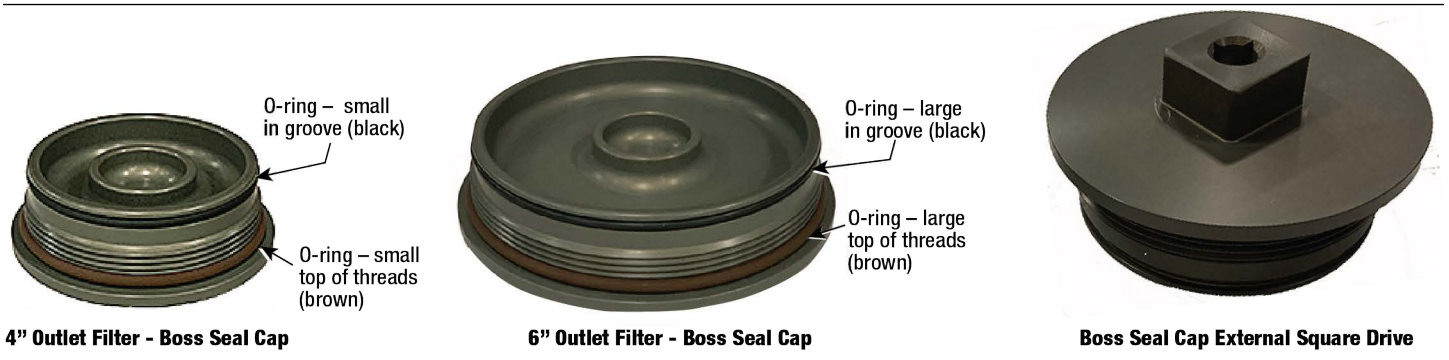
O-Ring Locations for Boss Seal Cap w/External Square Drive
